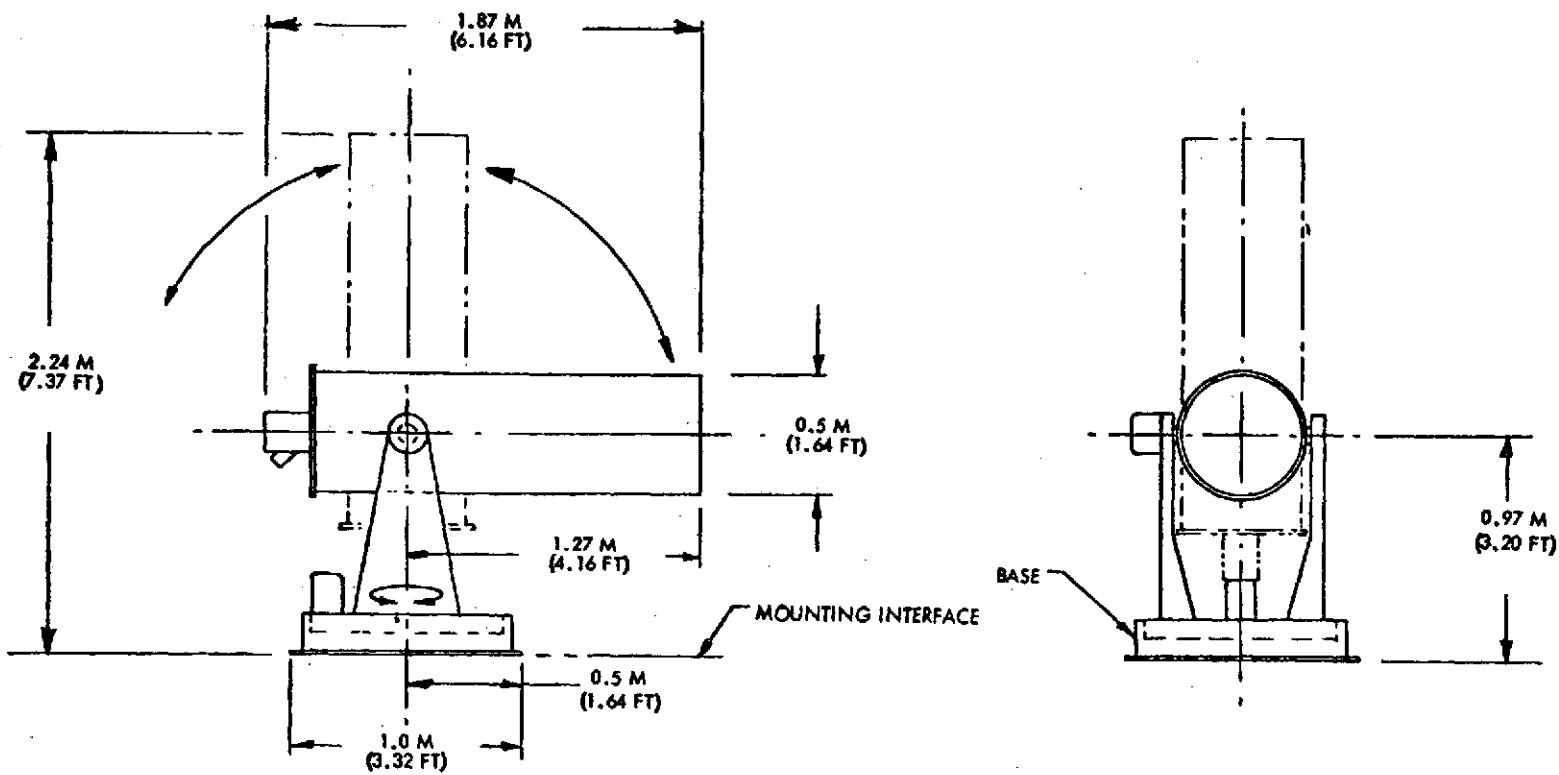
AP200 Laser Radar Equipment Envelope--Payload AP-06-S
